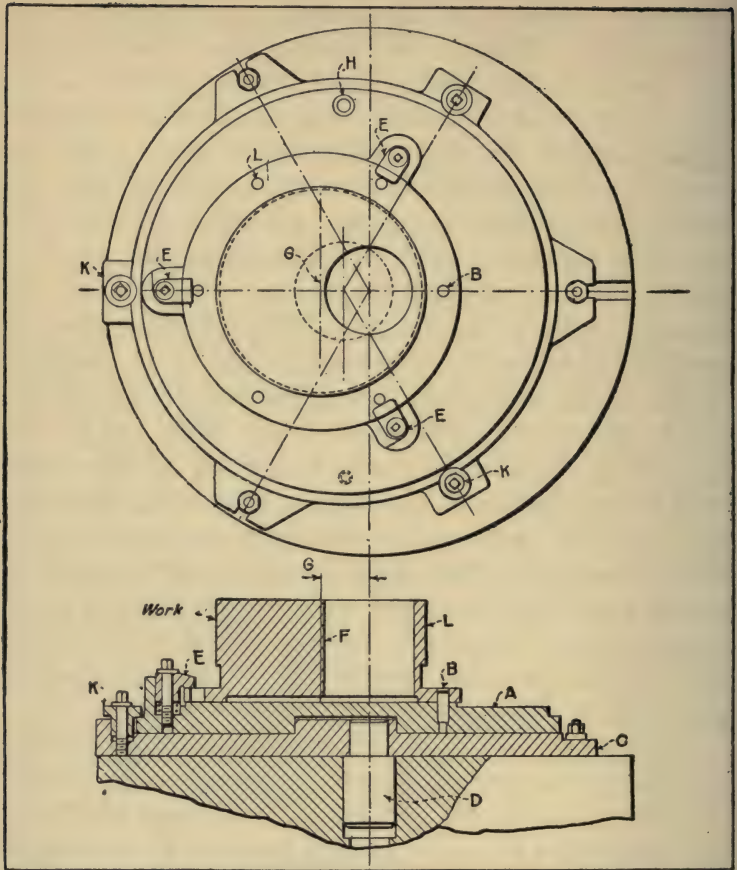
PLAN AND SECTION OF A FIXTURE FOR AN ECCENTRIC PIECE OF WORK
